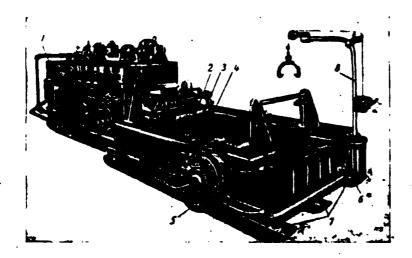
Baling machine with two steps/stages of the extrusion/pressing: 1 - drive of press (pumps, electric motors, control valves, tank); 2 - cover/cap of chamber/camera; 3 - the cover plate lock of chamber/camera; 4 - slider of first stage of extrusion/pressing; 5 - cylinder of the second step/stage of extrusion/pressing; 6 - mounting of press; 7 - channel bar; 8 - hoist.
